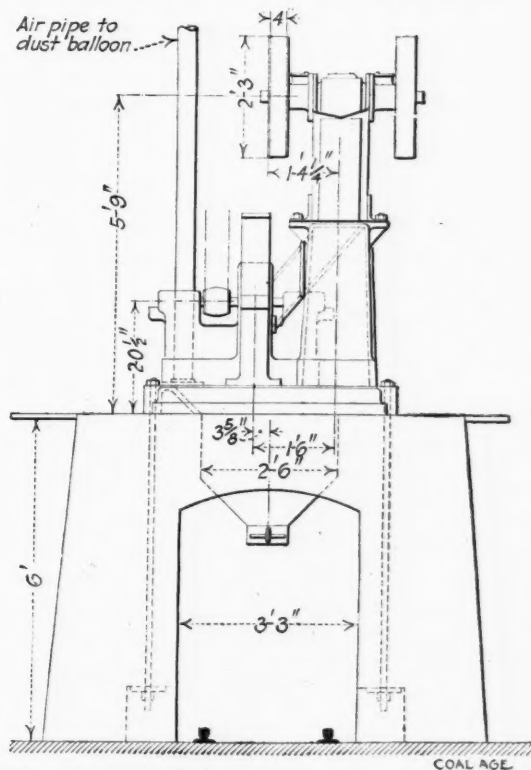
ARRANGEMENT OF A ROBEY ROCK-PULVERIZING PLANT
